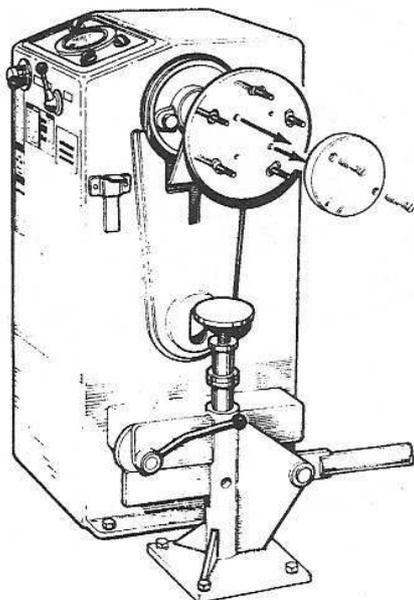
HORIZONTAL TYPE OF BALANCING MACHINE WITH ADAPTER FOR SPIGOTTED WHEELS
